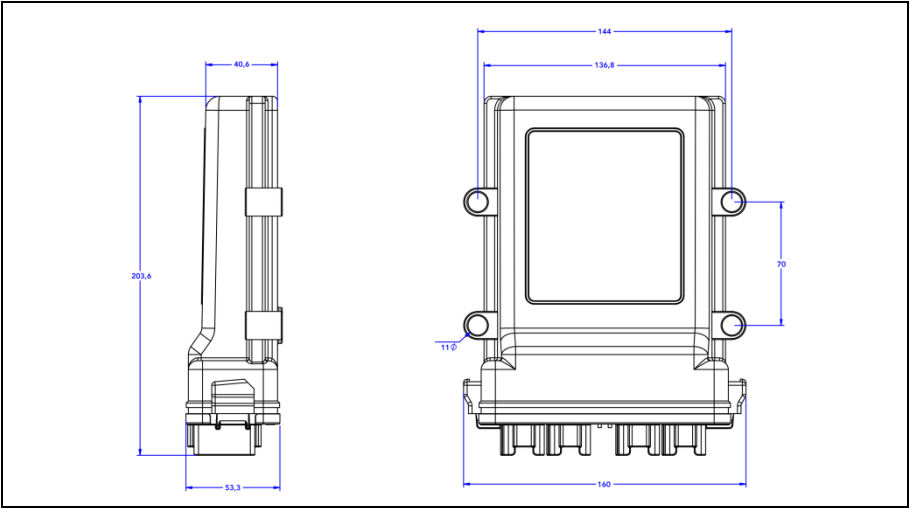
Tram Line ECU dimensions *code CJK-CEN-0001
